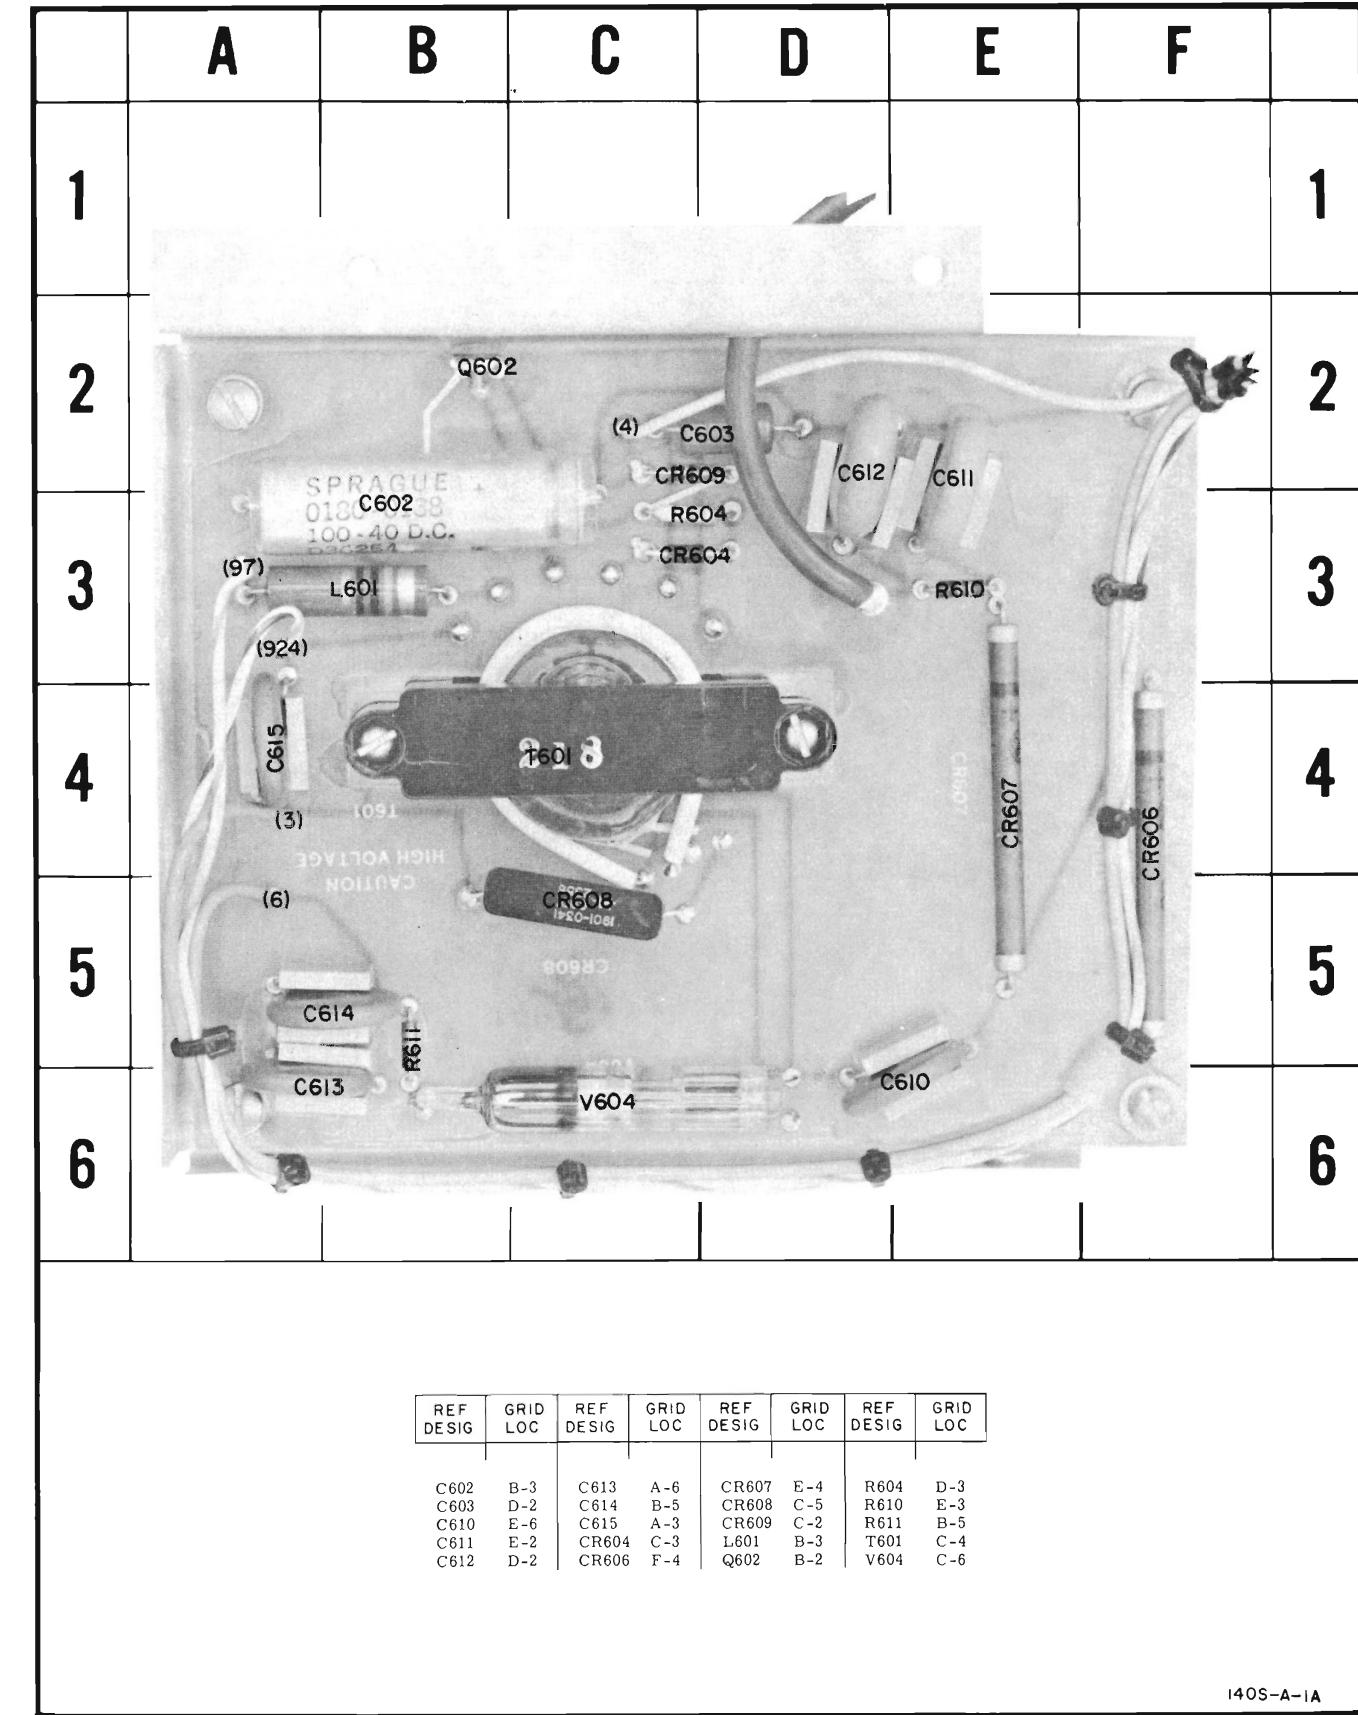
Component Identification High-Voltage Rectifier Board, A601
